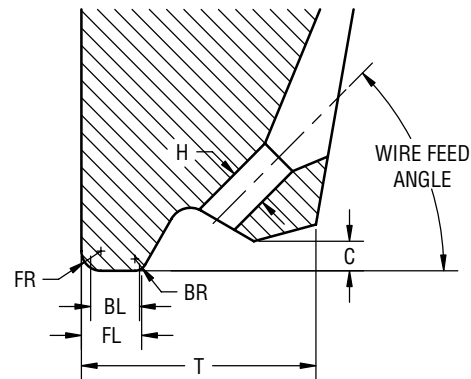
Cross-sectional view of a V-notch wedge with standard dimensions identified
